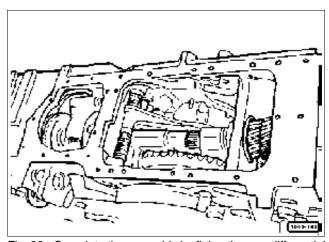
Complete the assembly by fitting the rear differential lock control fork.
